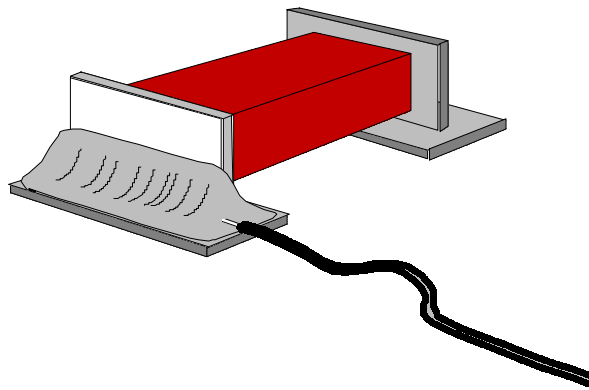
Addition of a wire link onto terminal pad of soldered chips
